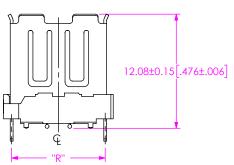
T: LOCKING TOOL APF6-025-03.5-XXX-04-X-T SHOWN (SAME AS FIG 1 & FIG5, EXCEPT AS SHOWN) (SOME CENTER FEATURES REMOVED FOR CLARITY)
